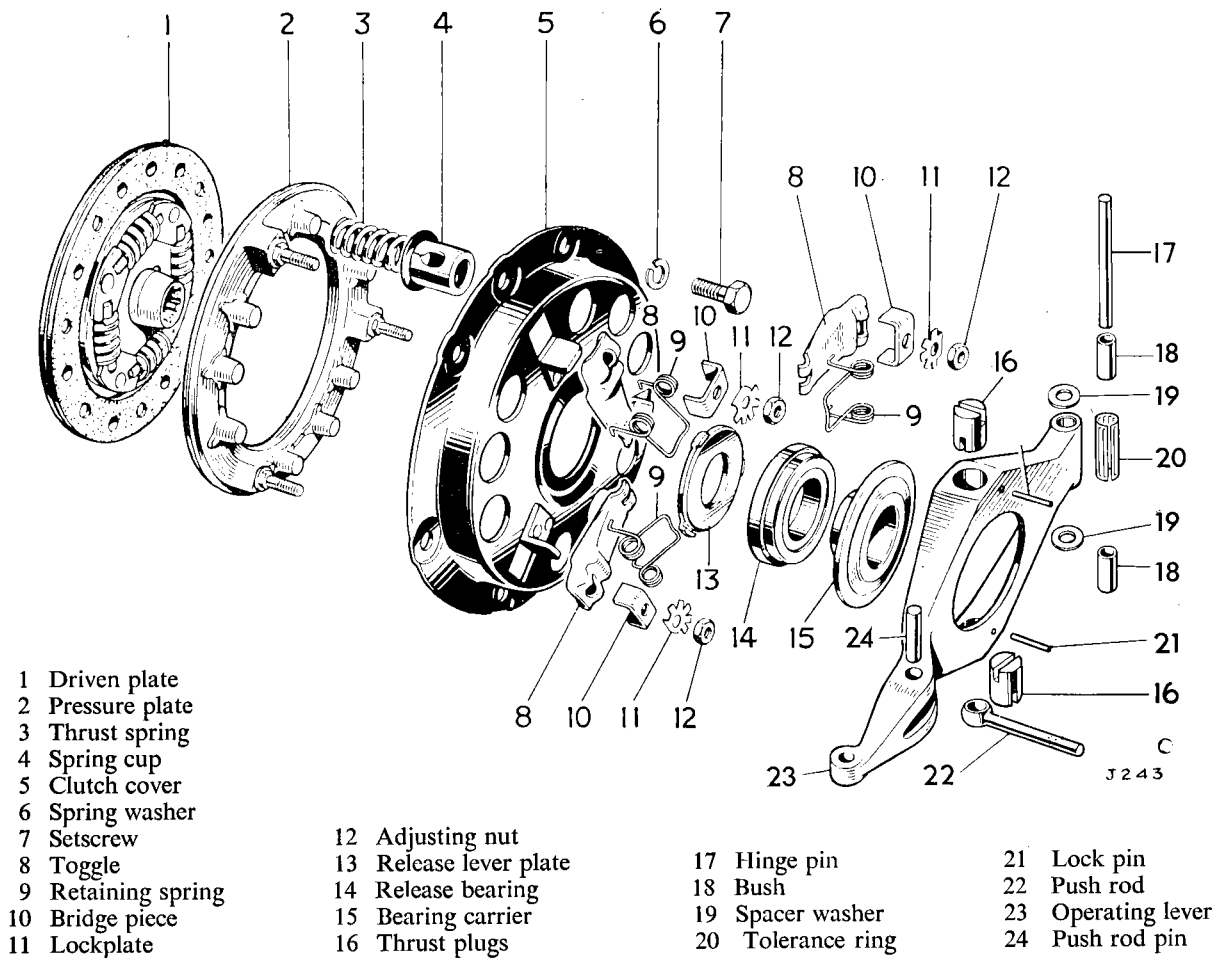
Exploded clutch unit (Herald 1200, 12/50 and Spitfire, condition prior to diaphragm type clutch)
